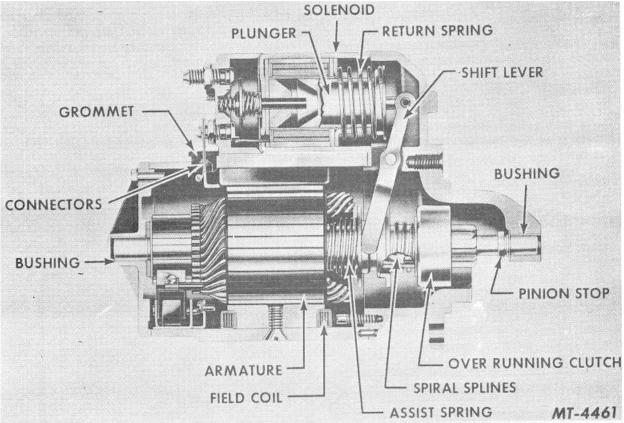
Sectional View of Enclosed Shift Lever Type Starting Motor
